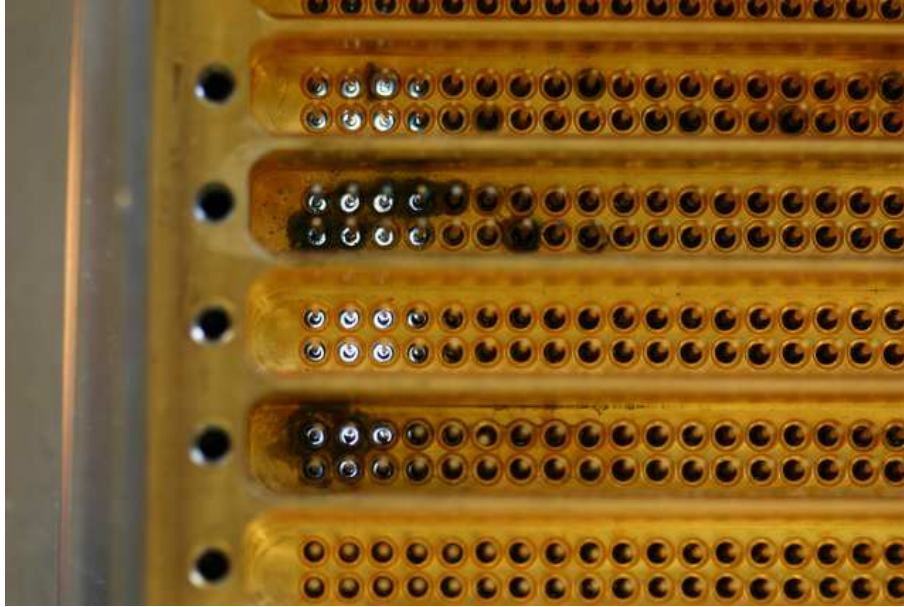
Corroded pin carrier from Victoria bench tests. The pincarrier is on a light table to illuminate the glass bead insulating the pin from the pincarrier body. Note the corrosion debris on some of the glass beads in the bottom picture.
